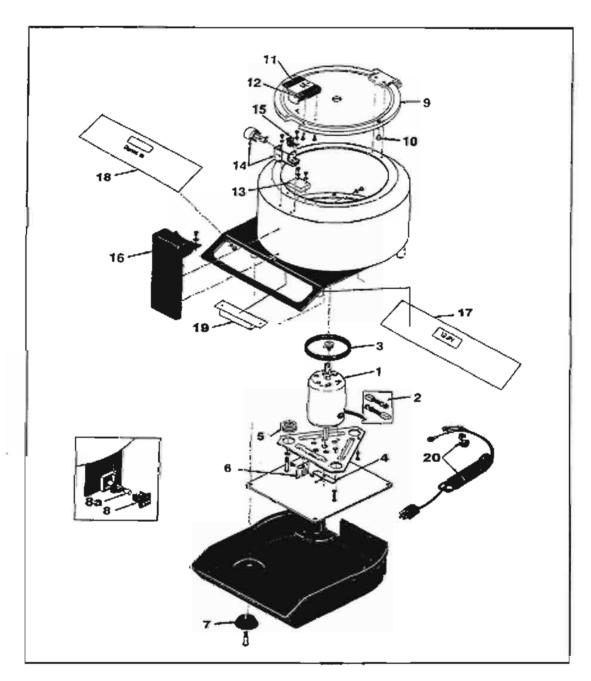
CENTRIFUGE EXPLODED VIEW
